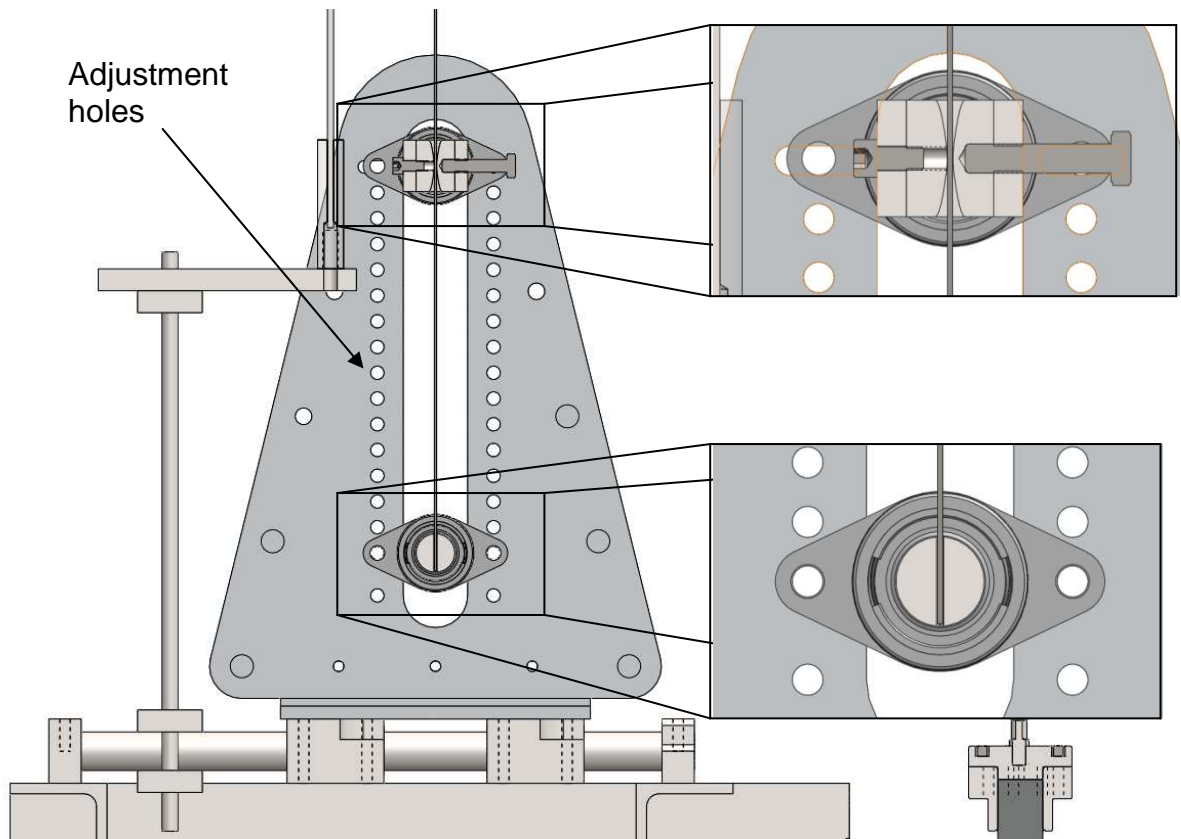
3D CAD section view showing clamp detail on Blade test rig
